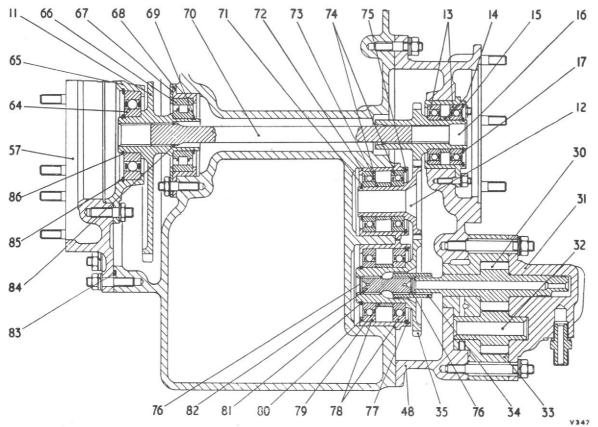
Scrap section of the circulating pump drive gear and the oil and hydraulic pump drive gear
